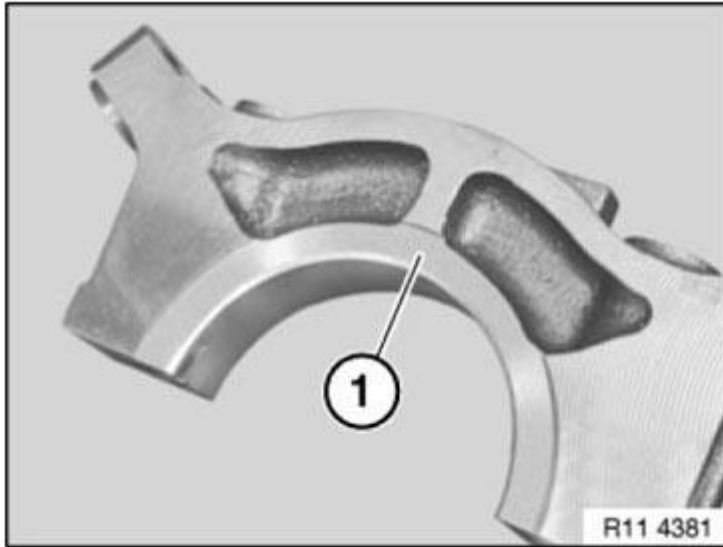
Identifying Main Bearing Cap Thrust Washers Surfaces
